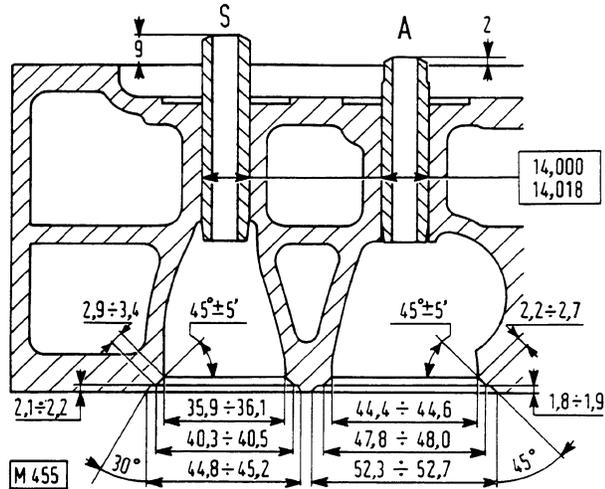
Valve seat and valve guide dimensions (Intake A-Exhaust S) on cylinder head and valve guide protrusion on head deck.
